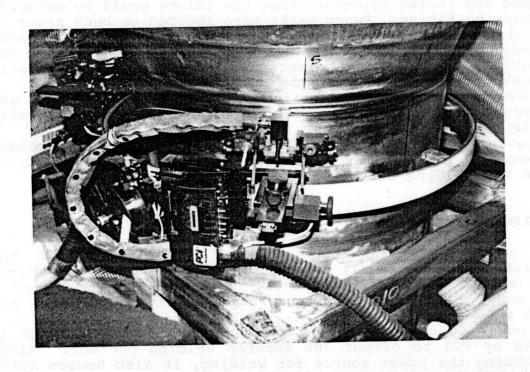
Typical Equipment Set Up in the Horizontal Position
